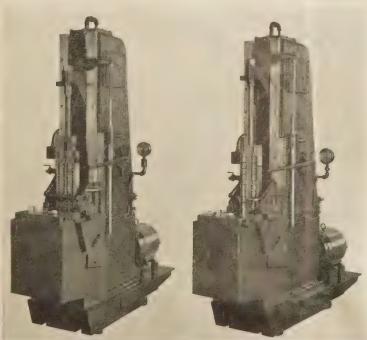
Machines for Broaching the Bearing Face and the Parting Line of Steel-Backed, Connecting-Rod Bearings
